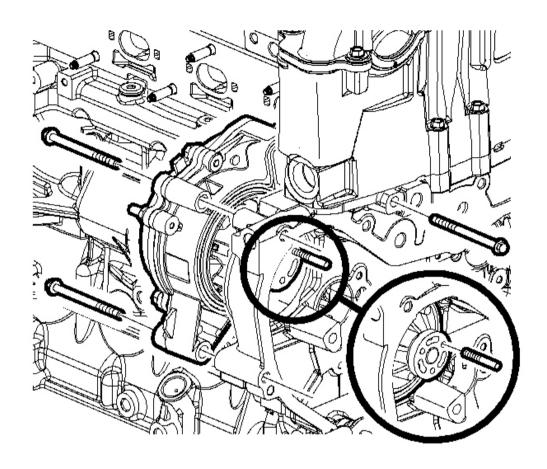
View Of Water Pump Sprocket Bolts Courtesy of GENERAL MOTORS CORP.
